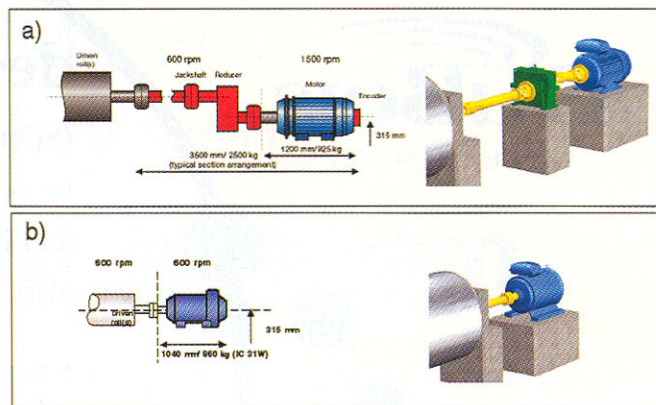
Drive configurations with: a) conventional induction motor drive, gear and jackshaft; and b) remarkable weight reduction with the Direct Drive.
